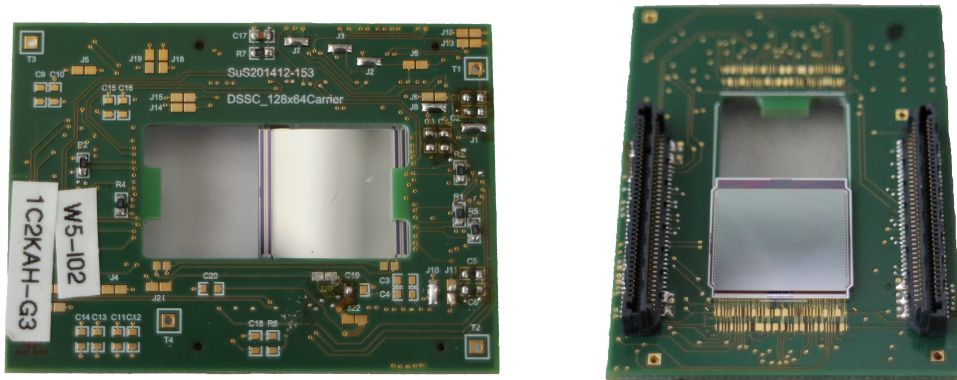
Left: Top view on a 64 x 64 MSDD and F1 assembly with the reflective entrance window visible. Right: Bottom view on the dense wirebonding area between carrier PCB and assembly, and the connectors.
